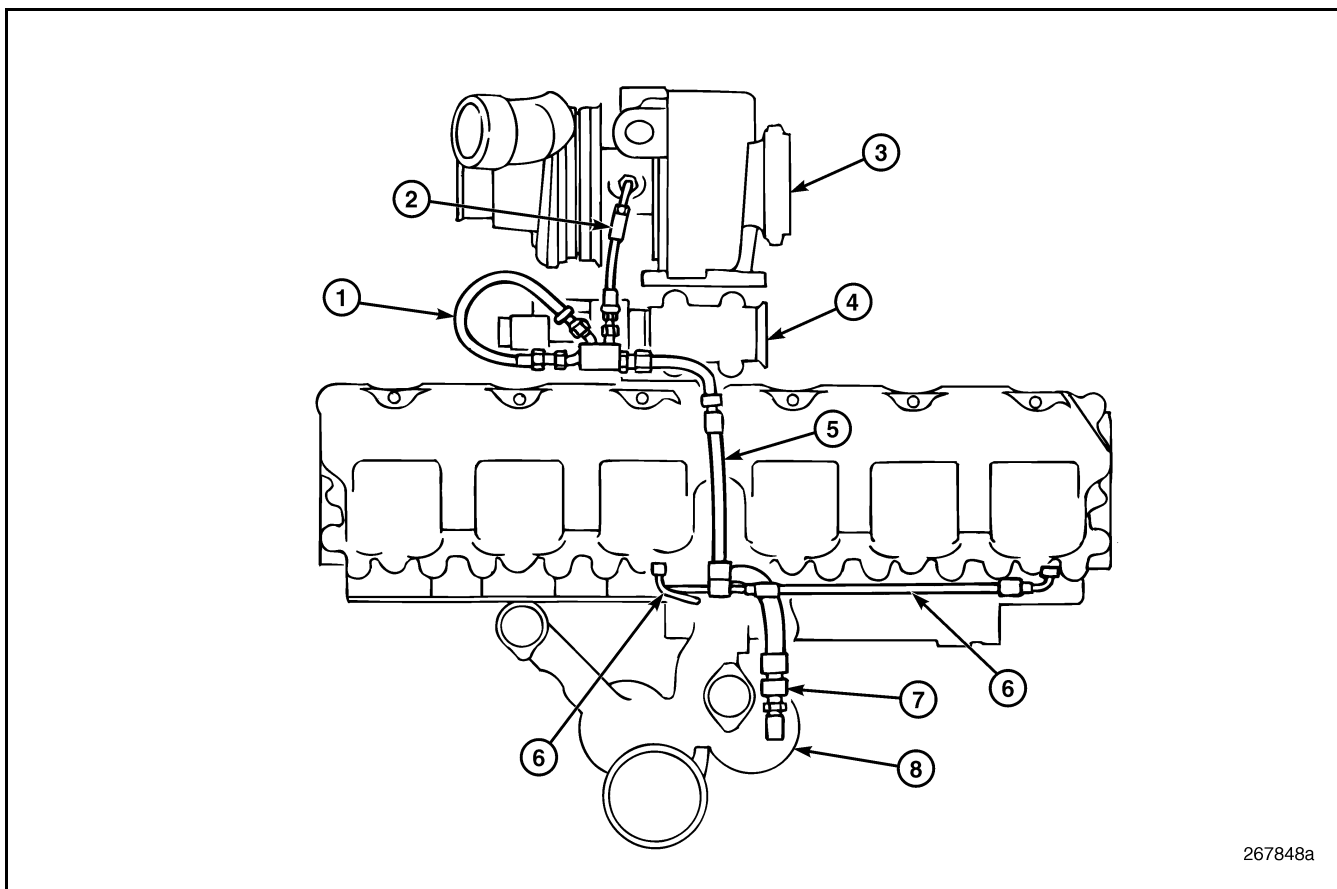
EGR and VTG Oil Supply Lines (AC Engines Built December 2003 and Prior)
